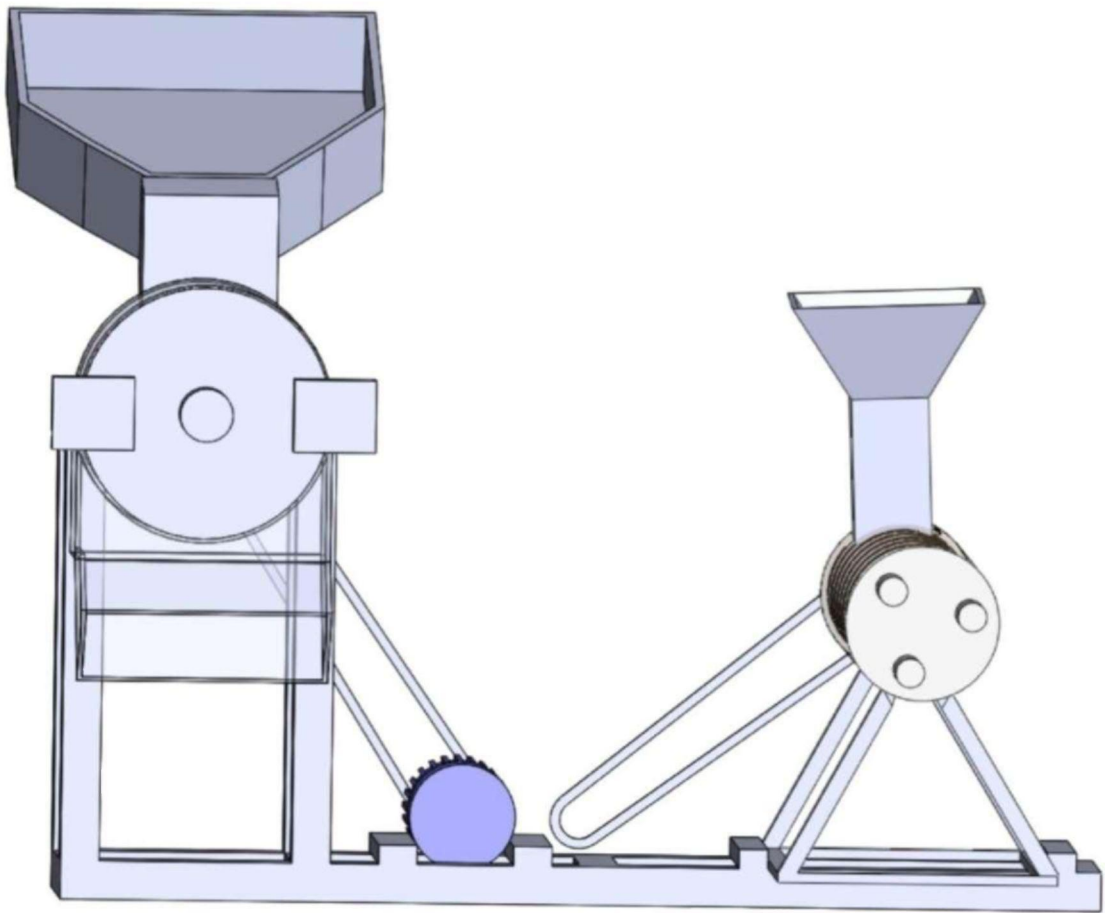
Front view of shredder cum Briquetting Machine in Solid Works
